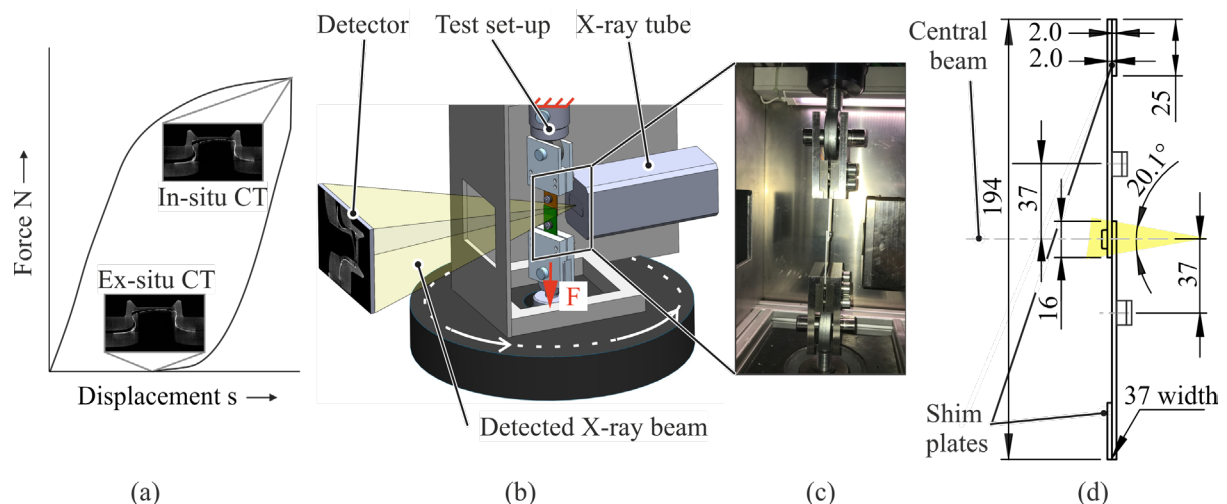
Schematic process of ex-and in-situ CT scans during the shear test (a), CT set-up (b), close-up view of the actual specimen (c) and dimensions of the specimen (d)
